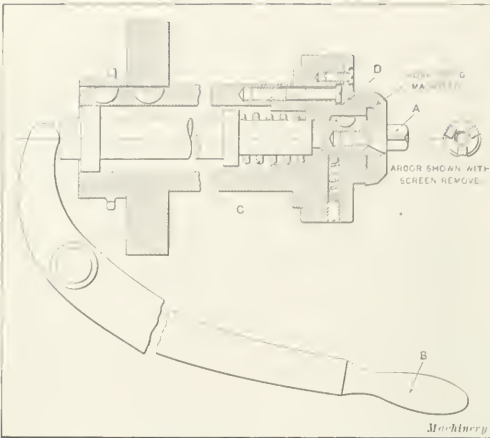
Expanding Draw-back Arbor on which Cutter Blanks are mounted
